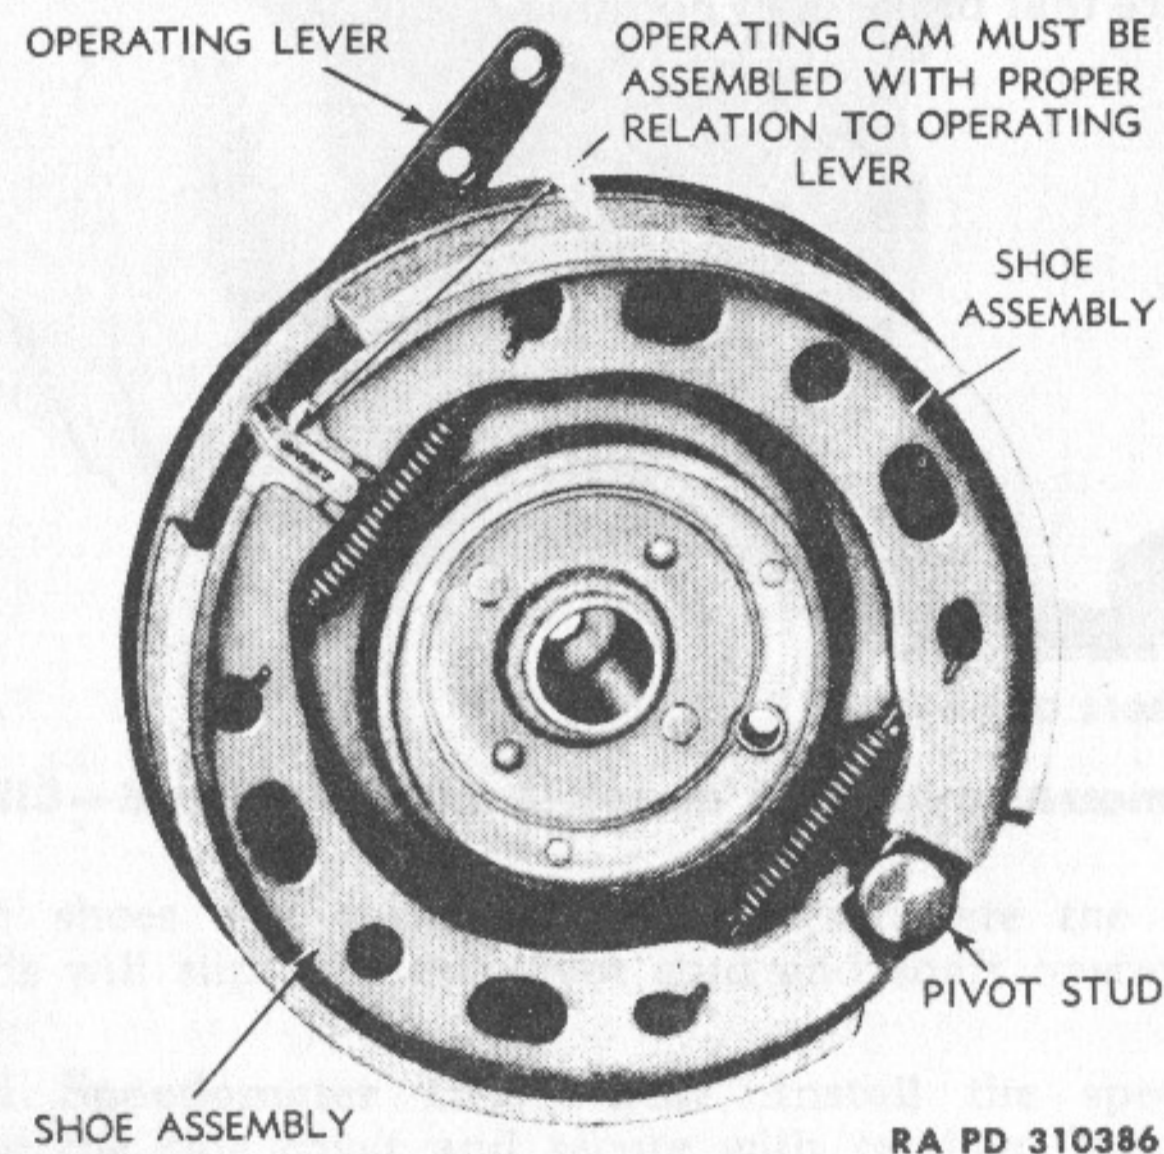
Front Wheel Brake Side Cover and Shoe Assembly (Inside)
